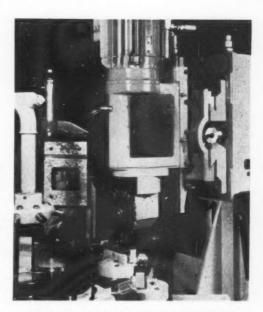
The vertical-spindle heads are mounted on compound slides with power feeds, and may be fitted with right-angle drive attachments for side and face milling cutters, as here shown
